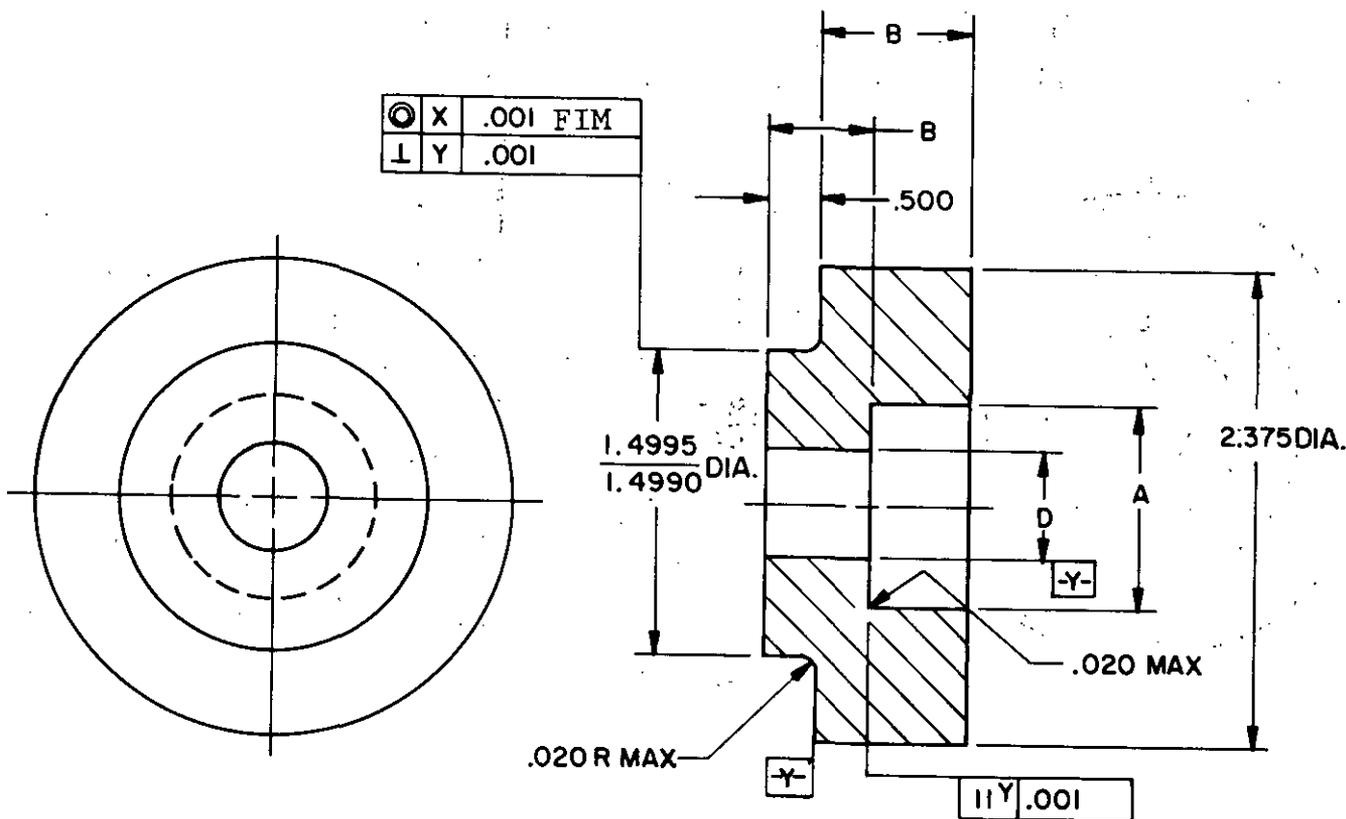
100° Adapter, 5,000 pound capacity holding fixture.
